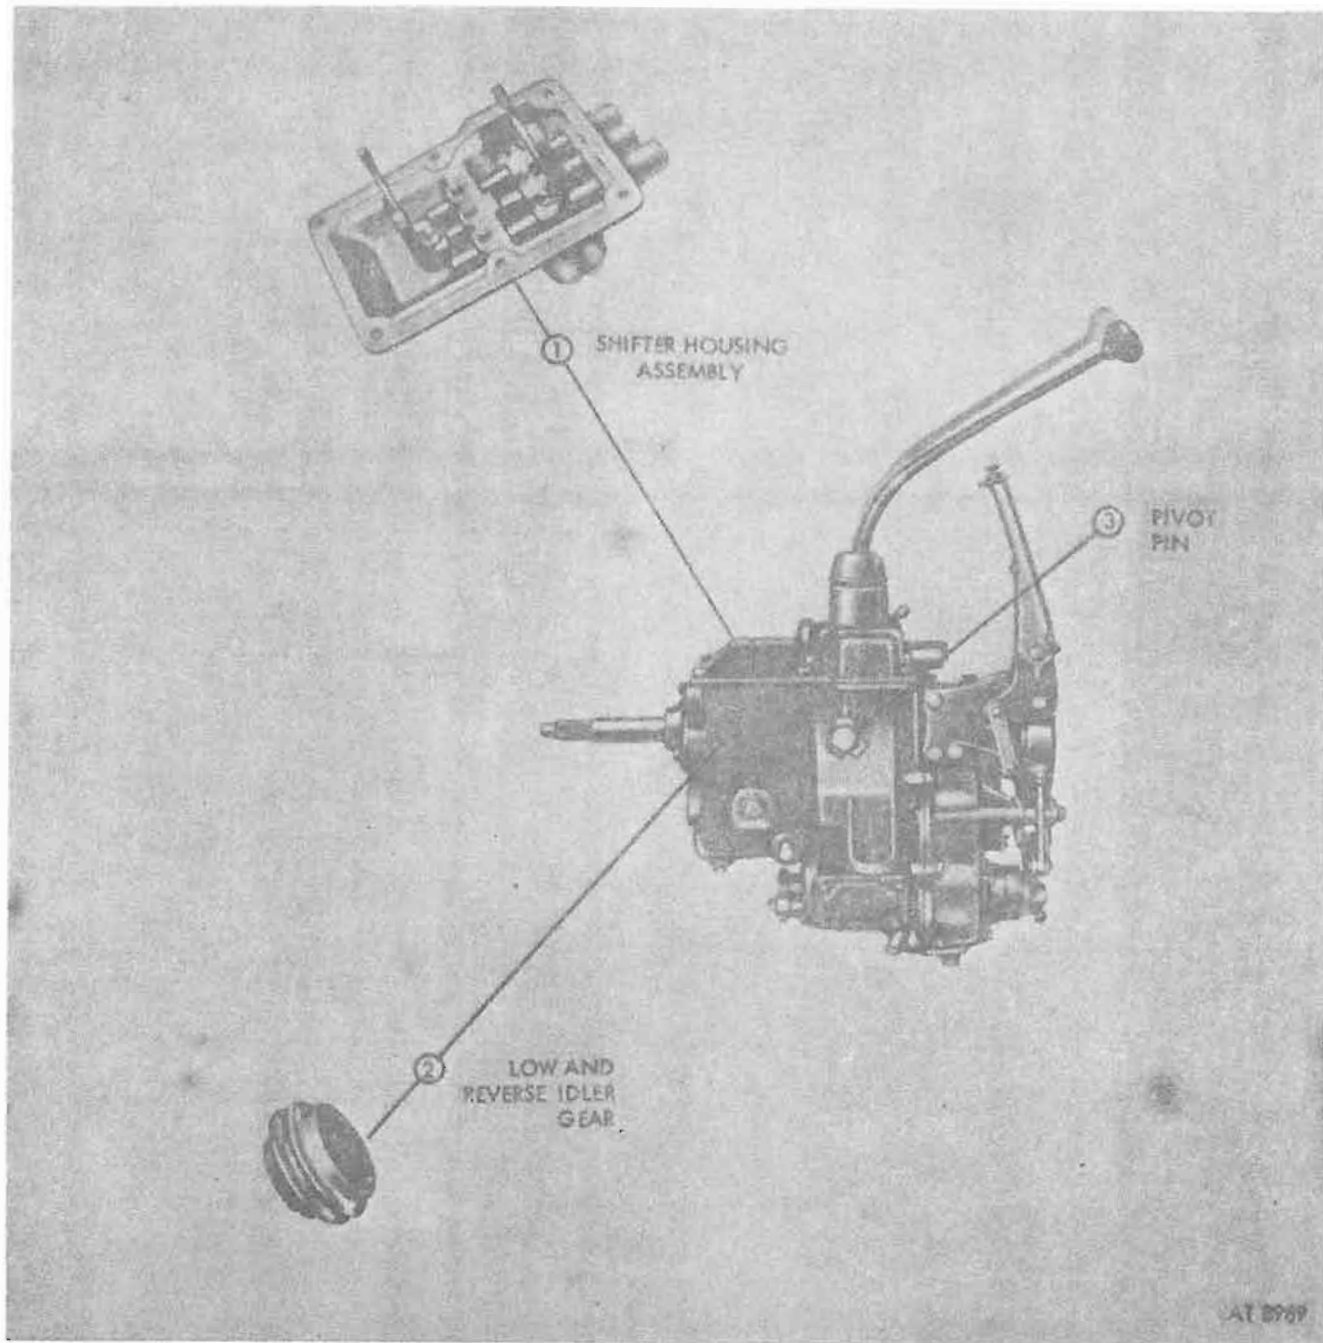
Gearshift lever stuck in reverse or first gear.
